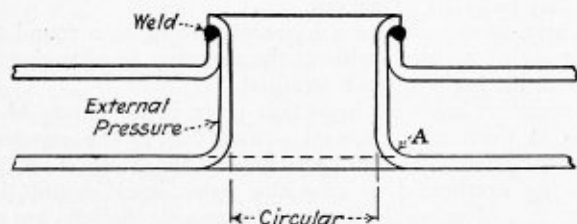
Construction of Furnace Door Opening with Projecting Edges Flanged and Welded
